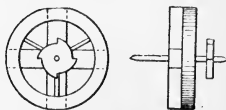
Fly-wheel Armature and Contact Breaker.
